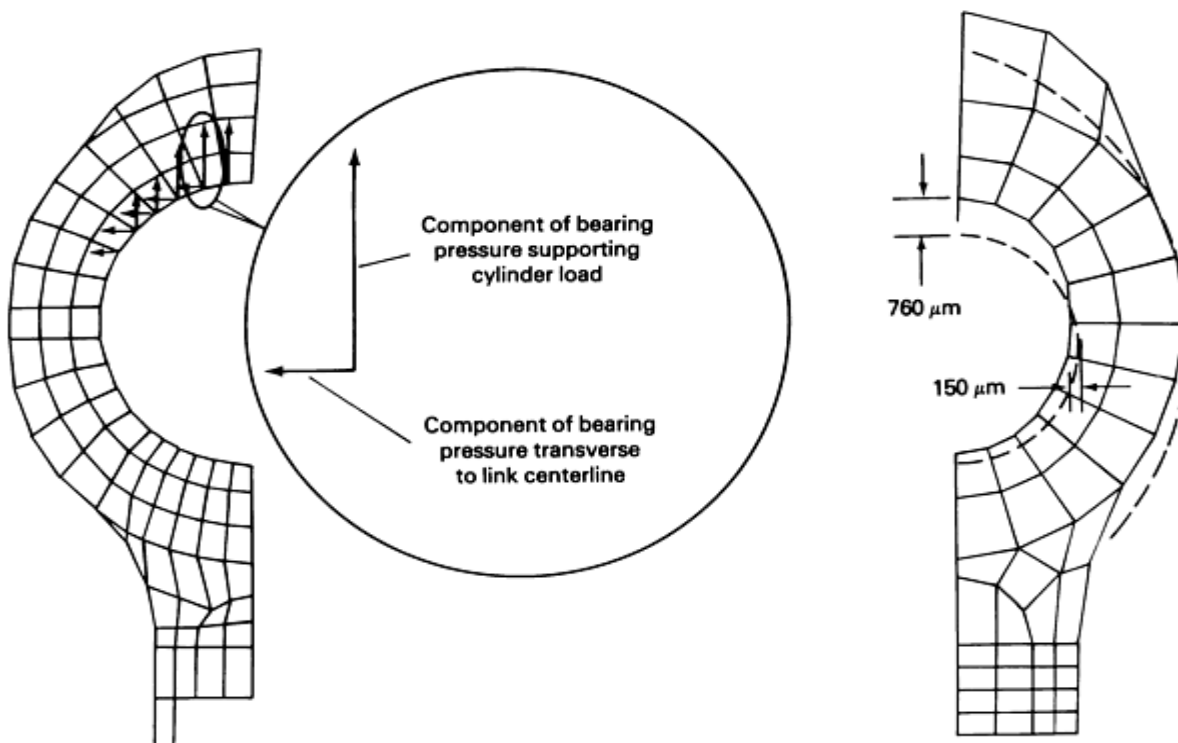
Bearing "pinch" generated by deformation of a small-end connecting rod
